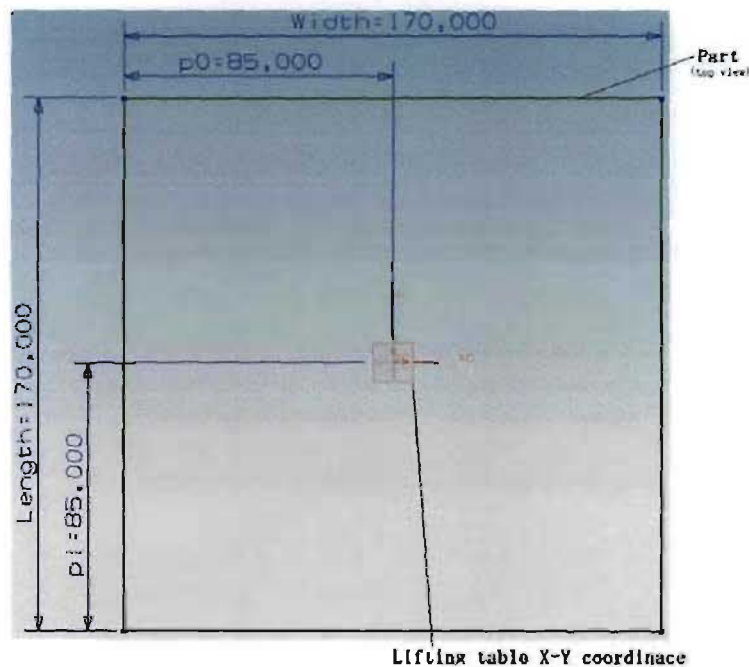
Top view of part and lifting table X-Y coordinate.
